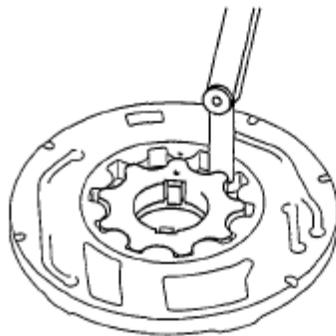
Measuring Oil Pump Gear Outer Clearance Using Feeler Gauge
